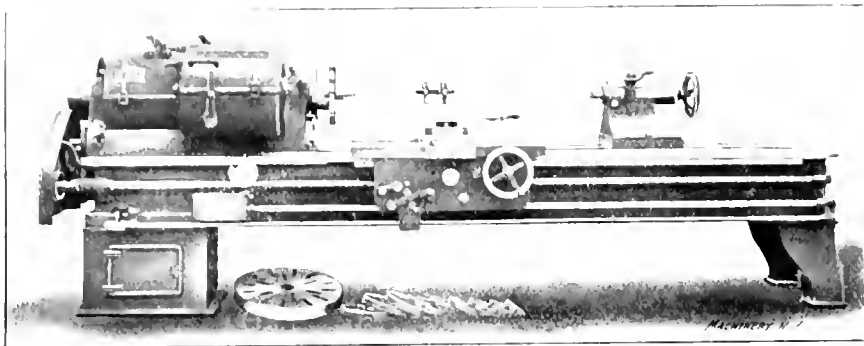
Geared-head Lathe built by Lidköpings Mekaniska Verkstad, Lidköping, Sweden.
